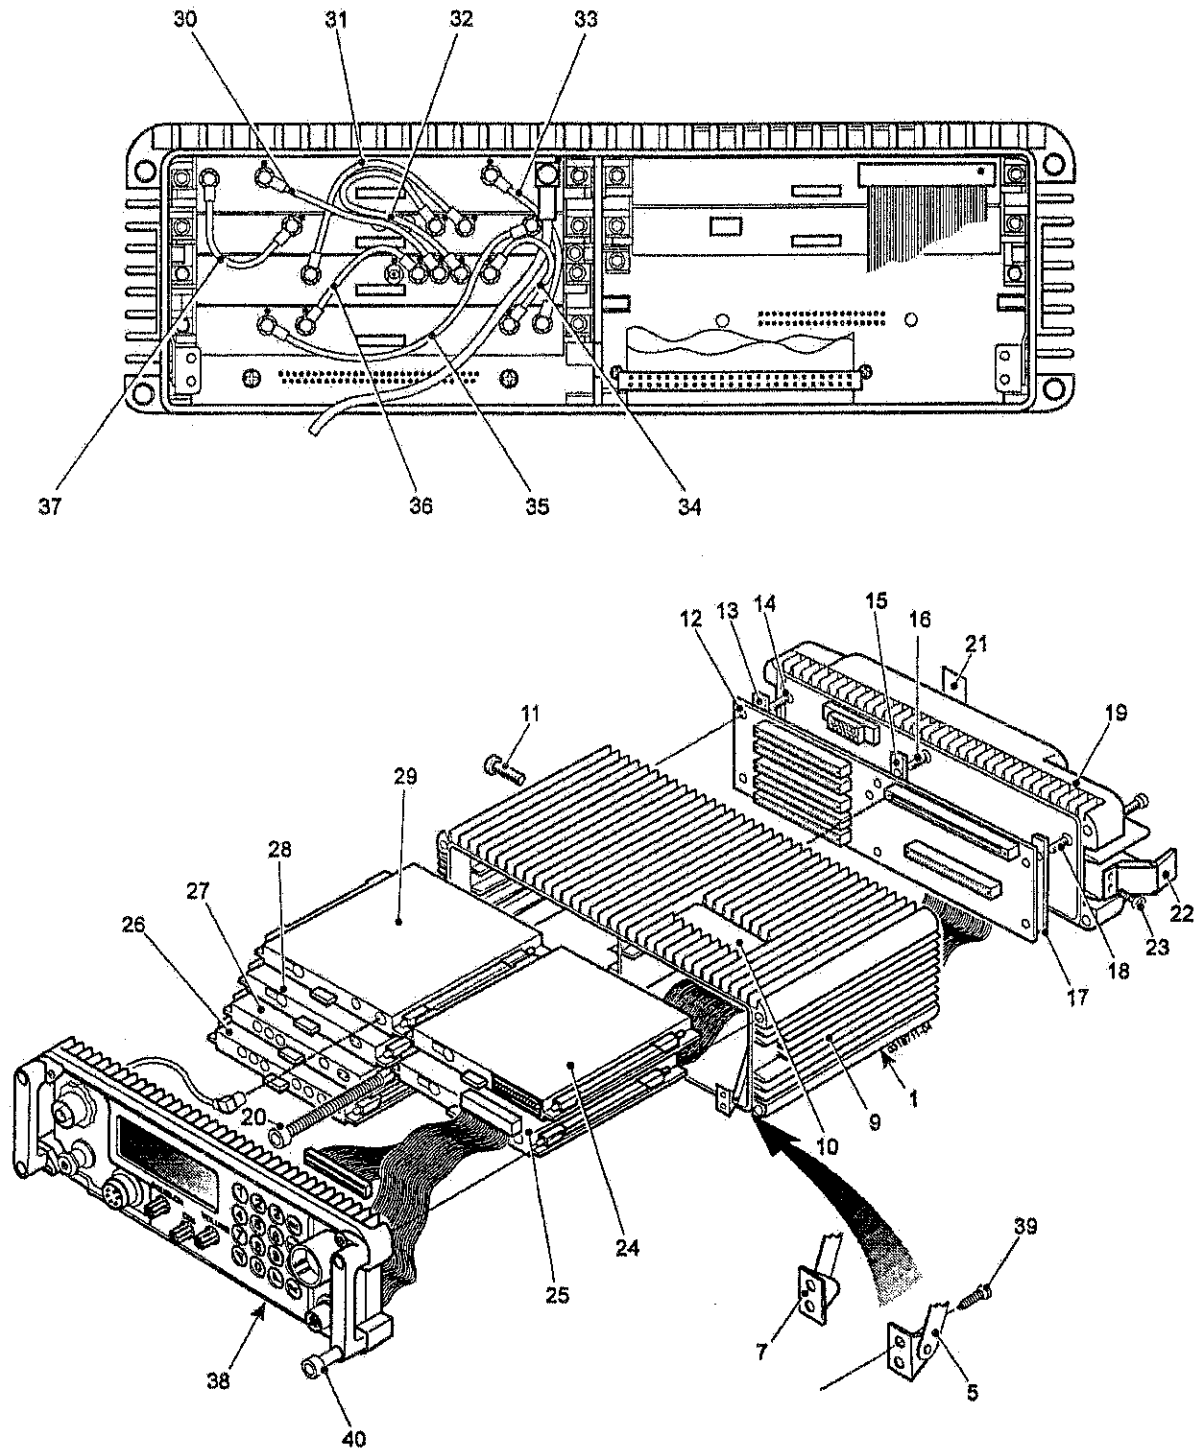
UK/RT 346 receiver/transmitter (R/T) unit assembly
